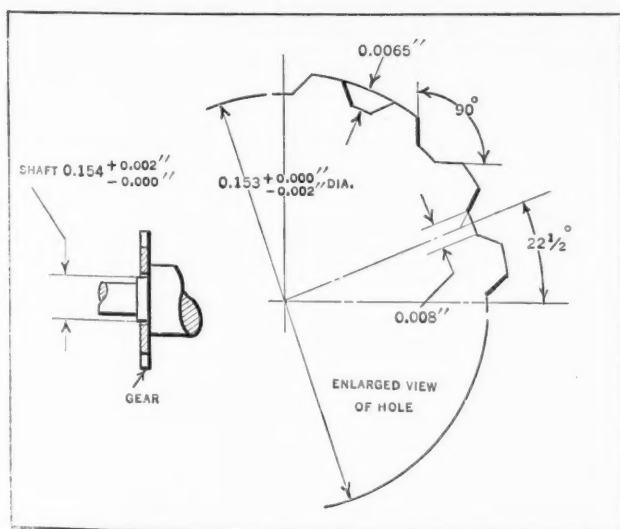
Die-cut Gear on Shaft, and Enlarged View of Serrations in Hole which Provide Better Grip on Shaft
